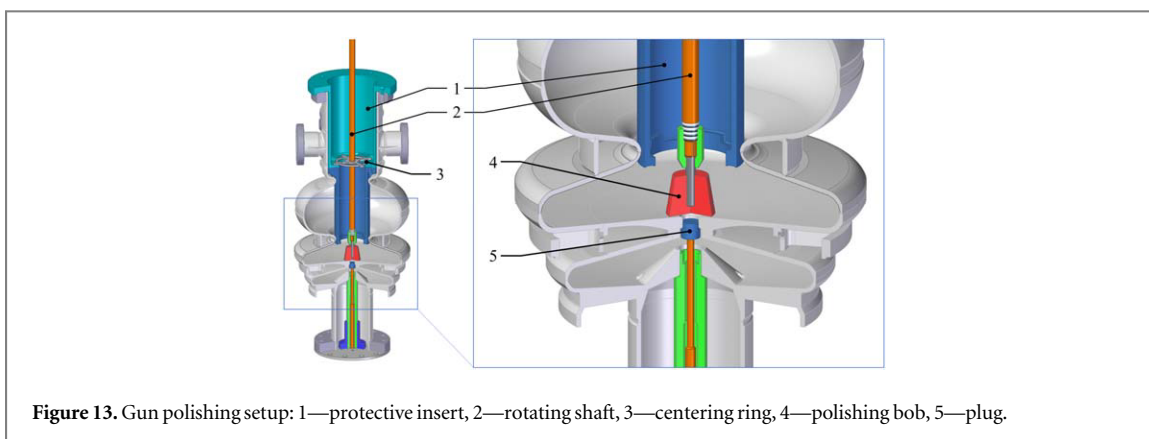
Gun polishing setup: 1—protective insert, 2—rotating shaft, 3—centering ring, 4—polishing bob, 5—plug.
